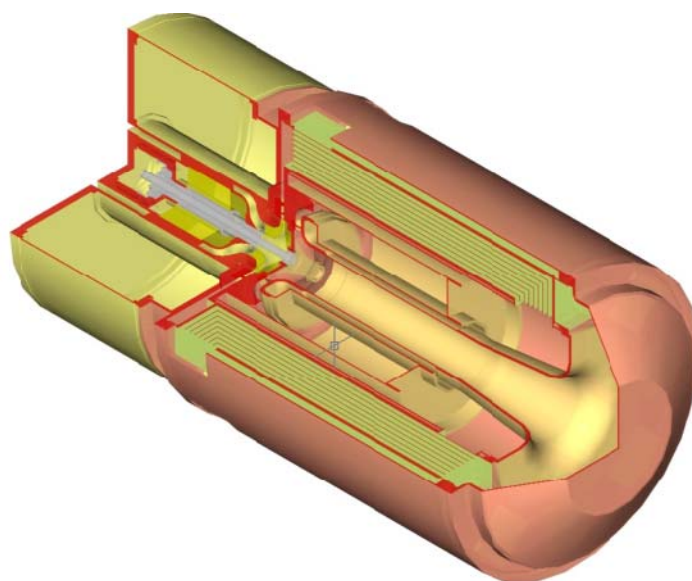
Sectional Drawing and Cut Model of Palm Top Gas Turbine.
